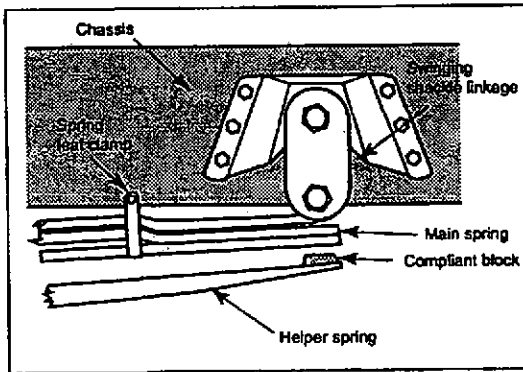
Example of helper spring fitted with compliant block to control impact noise
